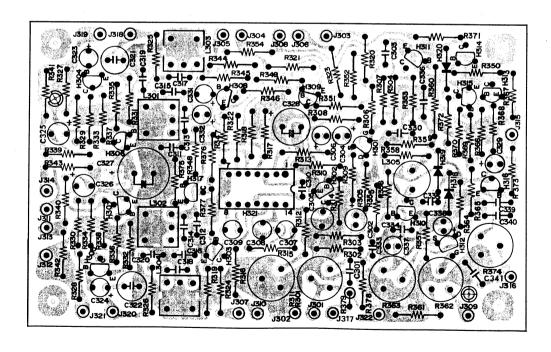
MPX Stereo Decoding Amplifier Assembly P300 Component Locations
